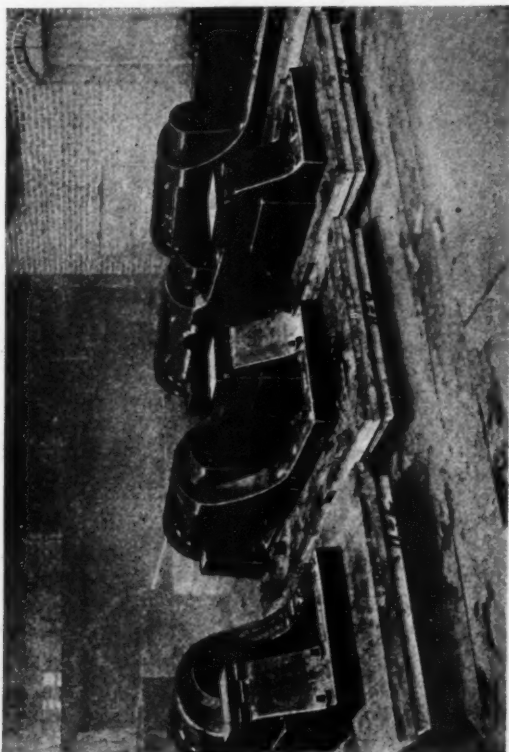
ENGINE FRAME PATTERNS MOUNTED FOR JOLT RAMMING MACHINE.
